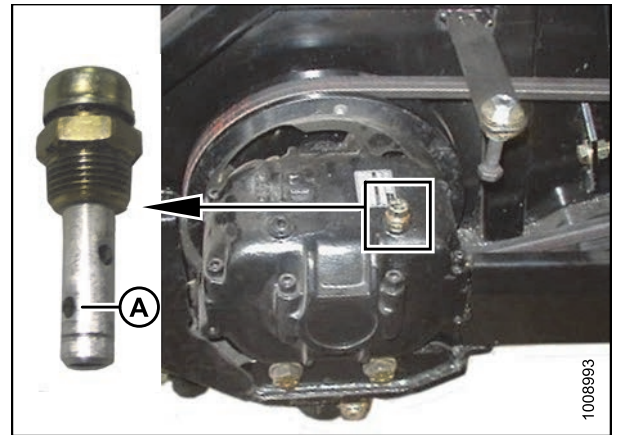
Side View of Knife Drive Box and Close-up of Dipstick
